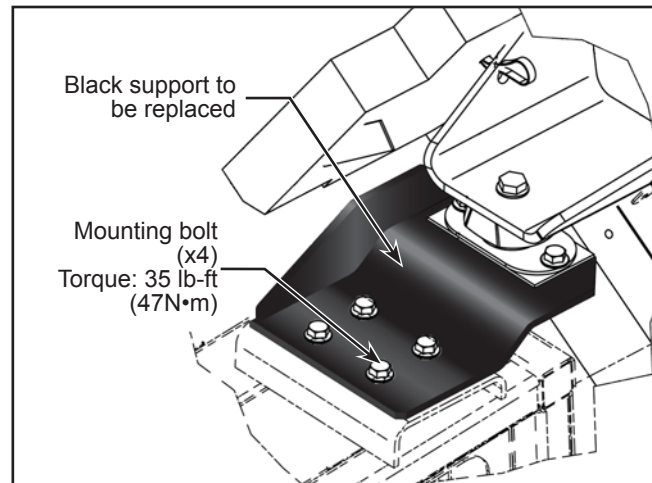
Upper Black Support (Left Side Shown/ Right Side Similar)
